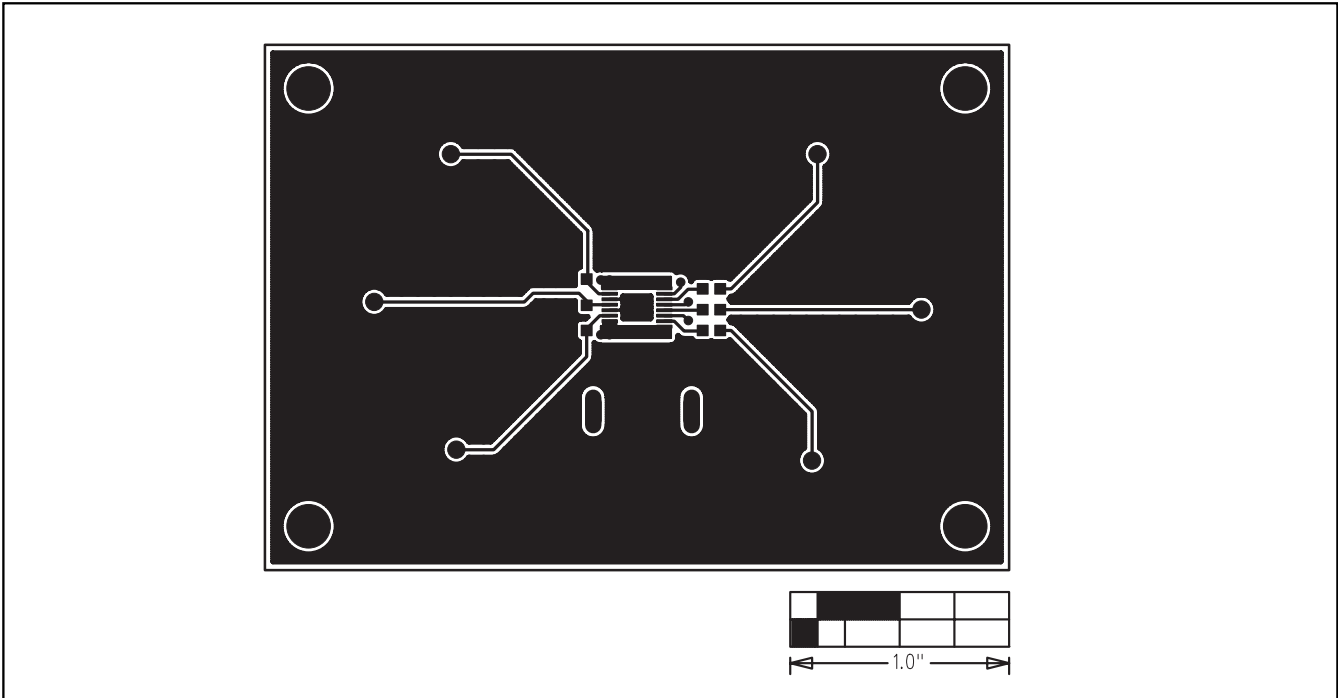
MAX9501 EV Kit PC Board Layout—Component Side
